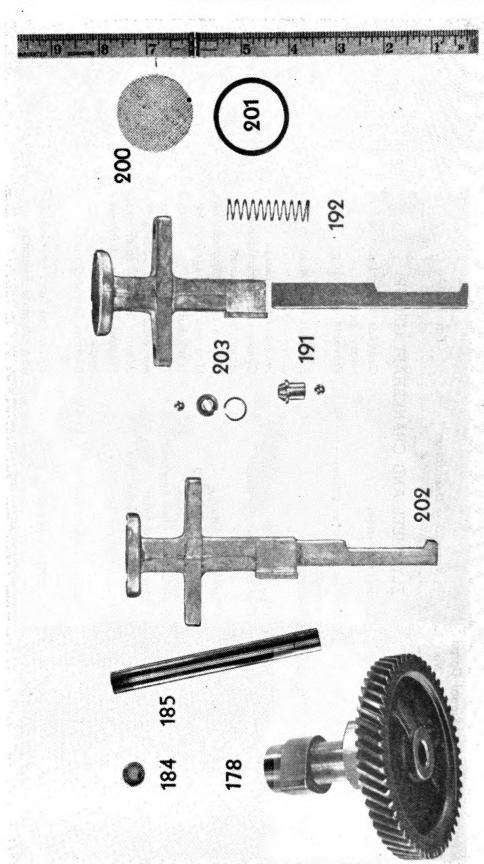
FLYWHEEL AND CAMSHAFT GROUP
